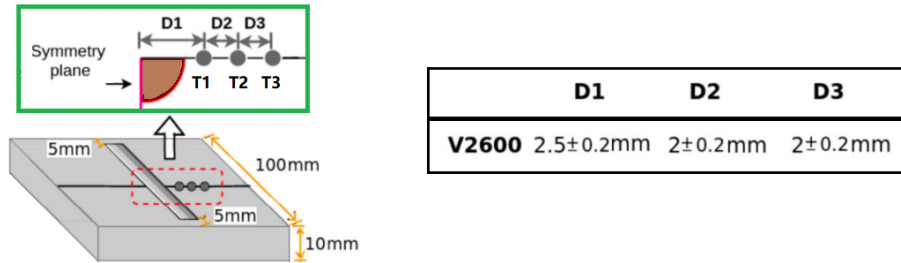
The dimensions of welding sample and locations of thermocouples.
